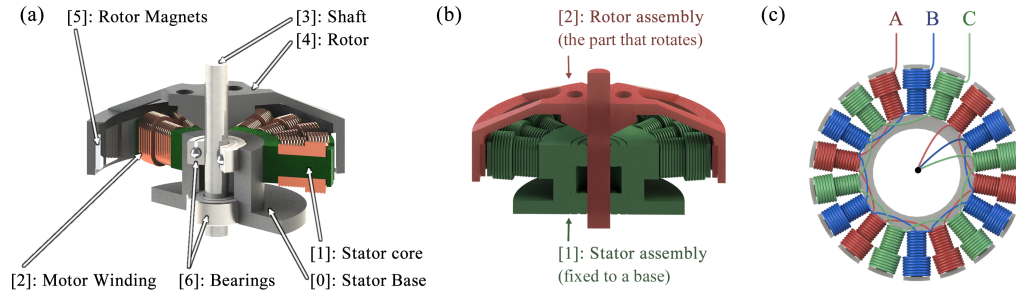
A breakdown of a standard three-phase brushless motor showing (a) a section view of the motor labeling all components to put the motor assembly into perspective, (b) the rotor assembly in red and the stator assembly in green to point out which parts are stationary and which parts rotate together and (c) a wiring diagram for how each of the channels  $\{A, B, C\}$  are routed through and around the stator core where the black dot indicates the common node at which the ends of the windings for each channel connect to each other.
